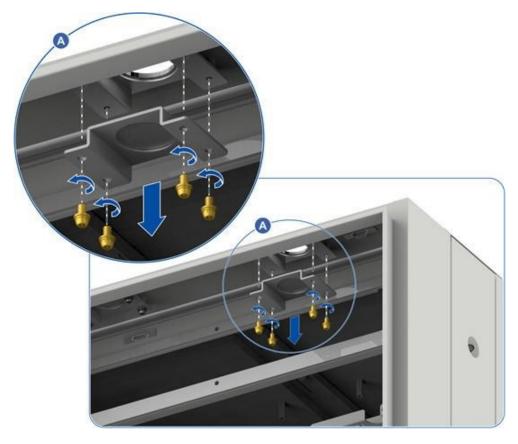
Removing the Screws from the Cover Plate of the Routing Hole
